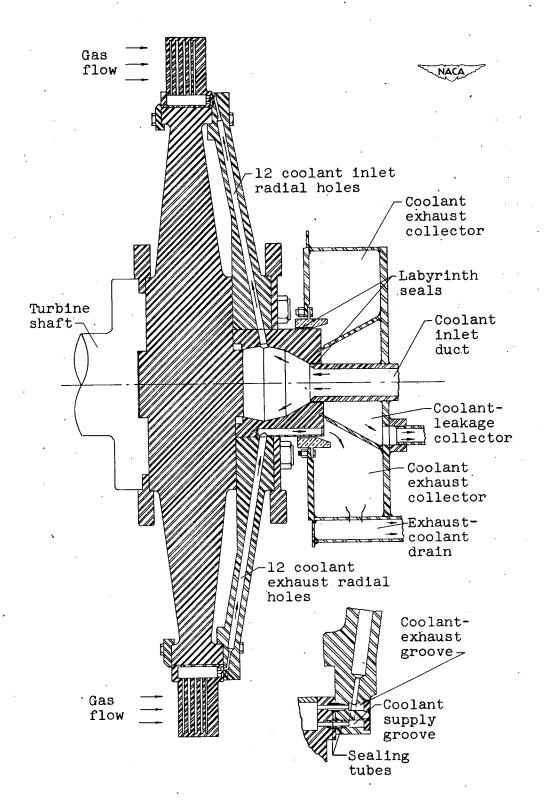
Cross section of cooled turbine rotor with removable blades showing sealing arrangement.
